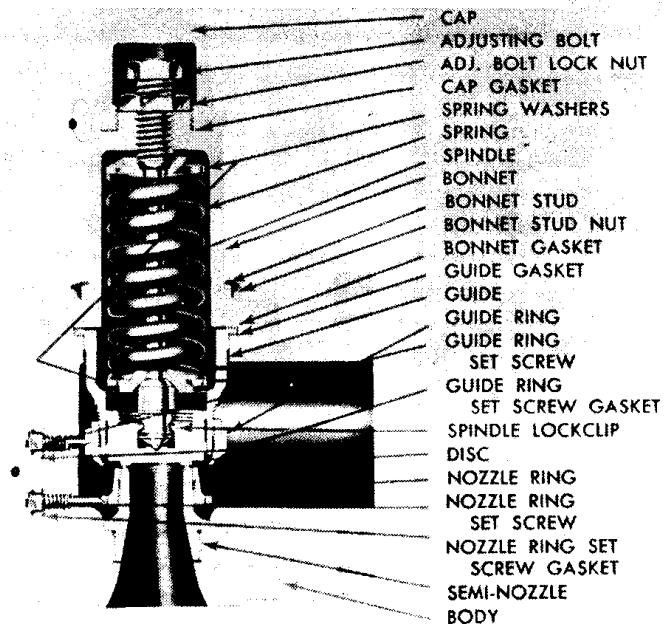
The inlet flange in the body of a seminozzle valve is wetted by the process fluid.
